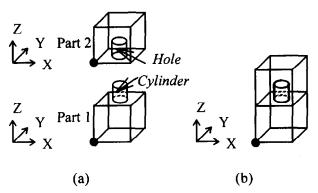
An assembly modelling process: (a) Part 1 and Part 2; (b) after assembling
